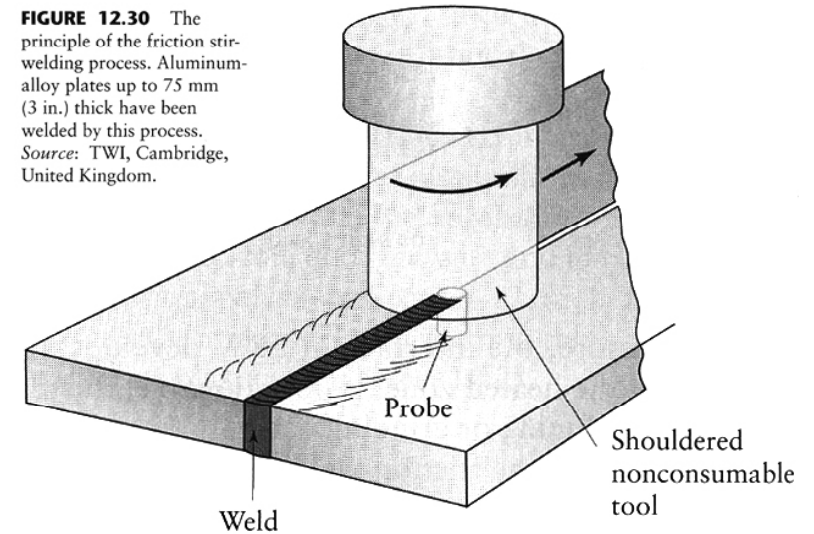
The principle of the friction stir-welding process. Aluminum-alloy plates up to 75 mm (3 in.) thick have been welded by this process. Source: TWI, Cambridge, United Kingdom.
